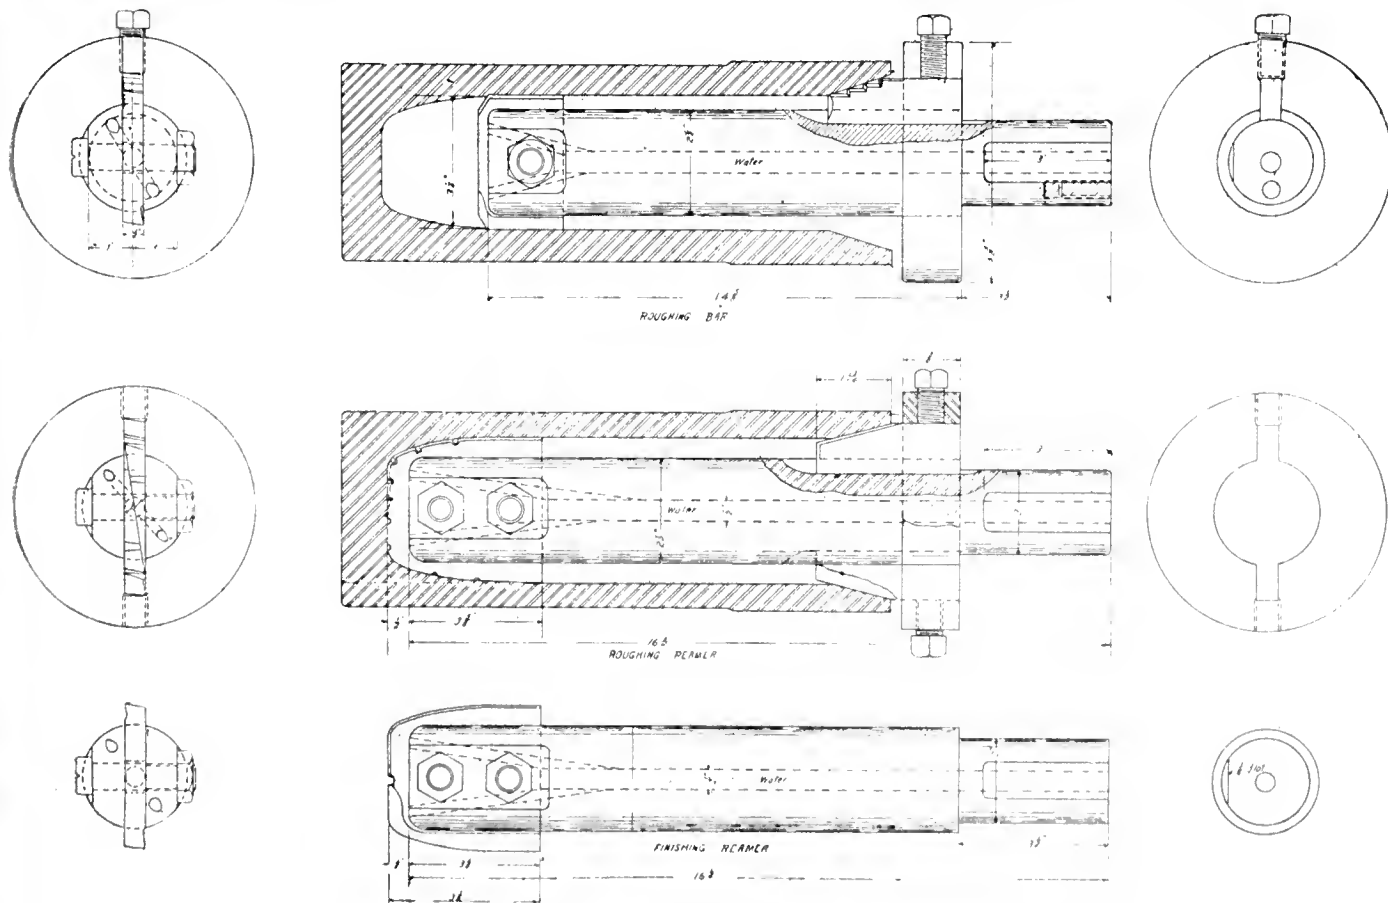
ILLUSTRATING CYCLE OF OPERATIONS ON INSIDE BORE MACHINING.
